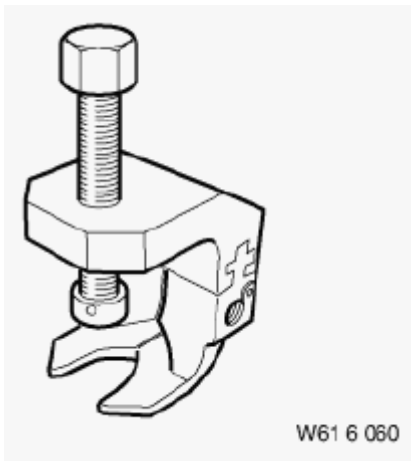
Universal Wiper Arm Puller (61 6 060)
